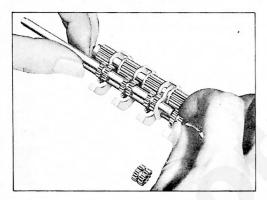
REMOVING GEARS TO RIGHT OF CENTER-SUPPORT BEARING
